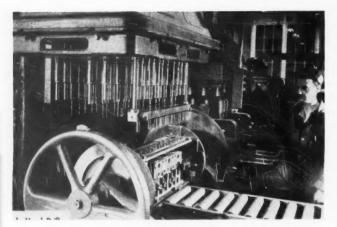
All Holes in Both Sides of Cylin-der Heads are Drilled in This Machine
